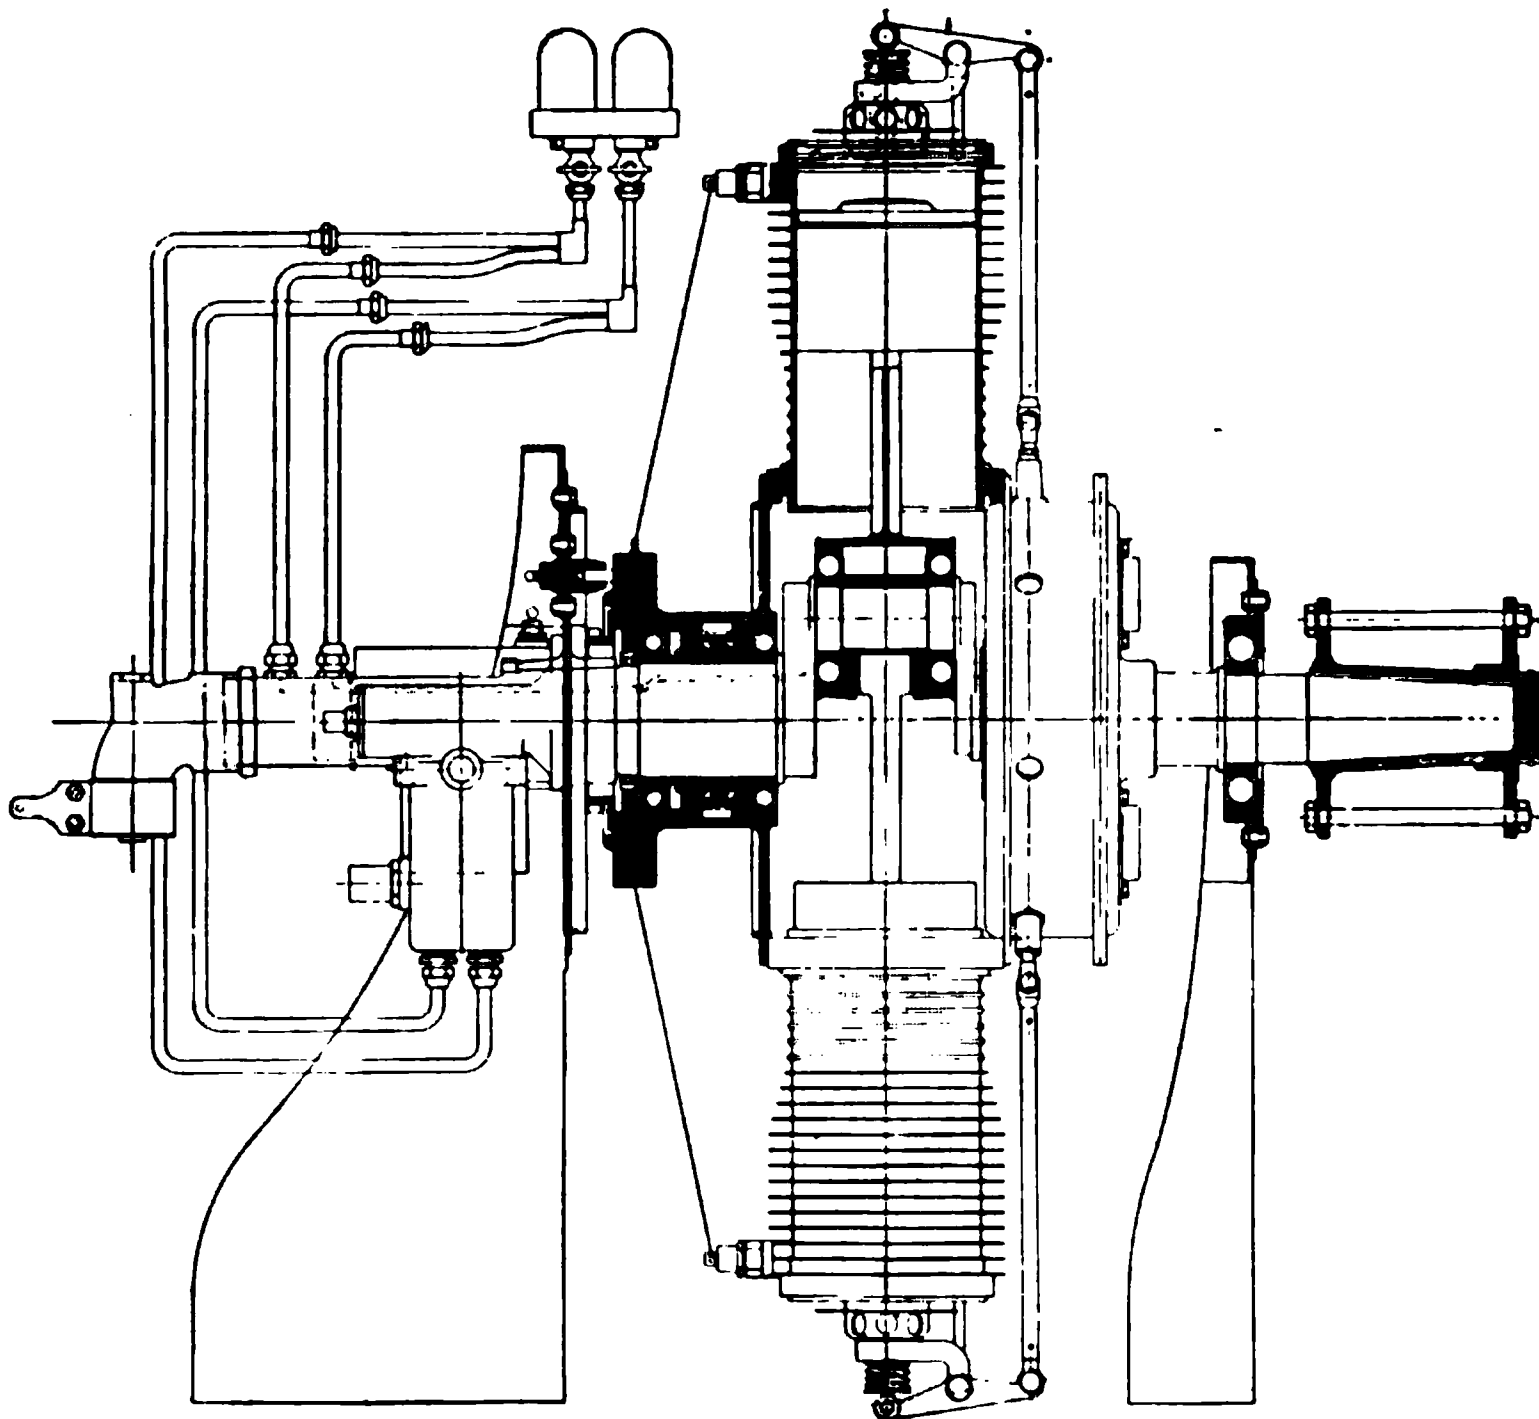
Longitudinal Section of Indian Rotary Engine.
